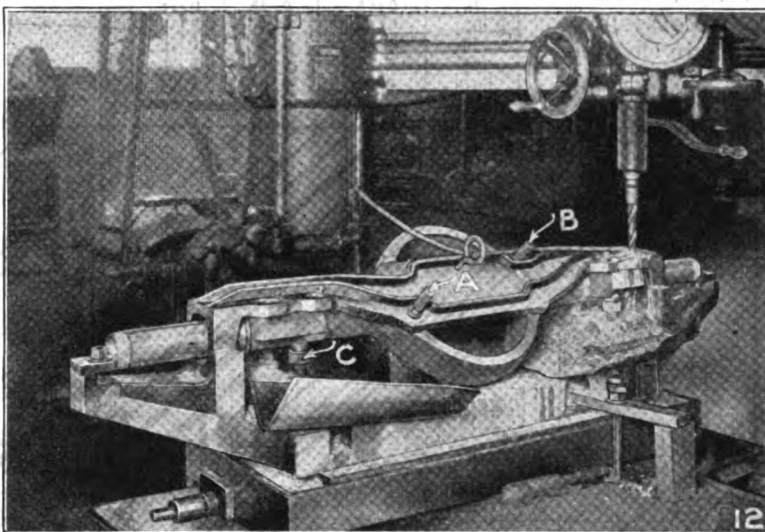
DRILLING PADS FOR SPRING BOLTS
